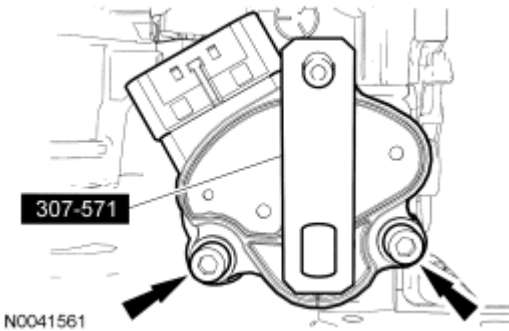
Identifying Special Tool (307-571) And TR Sensor Bolts
